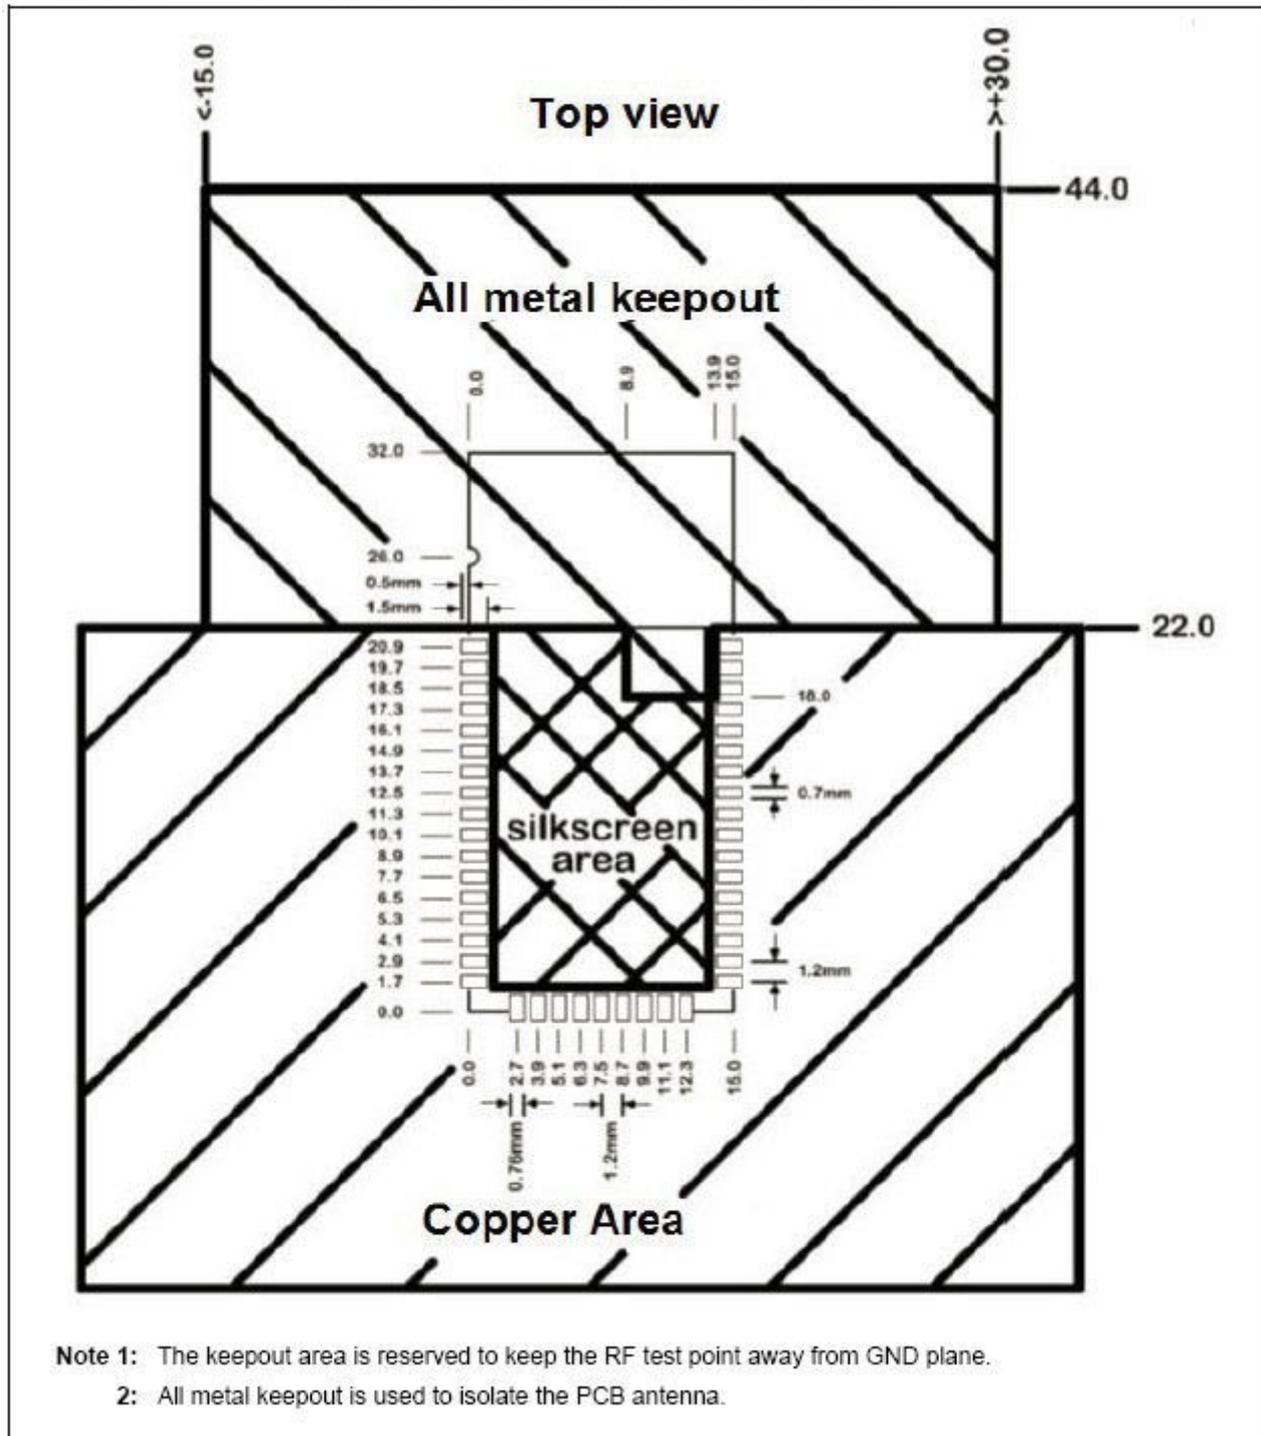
illustrates the recommended PCB footprint of the BM64 module.
